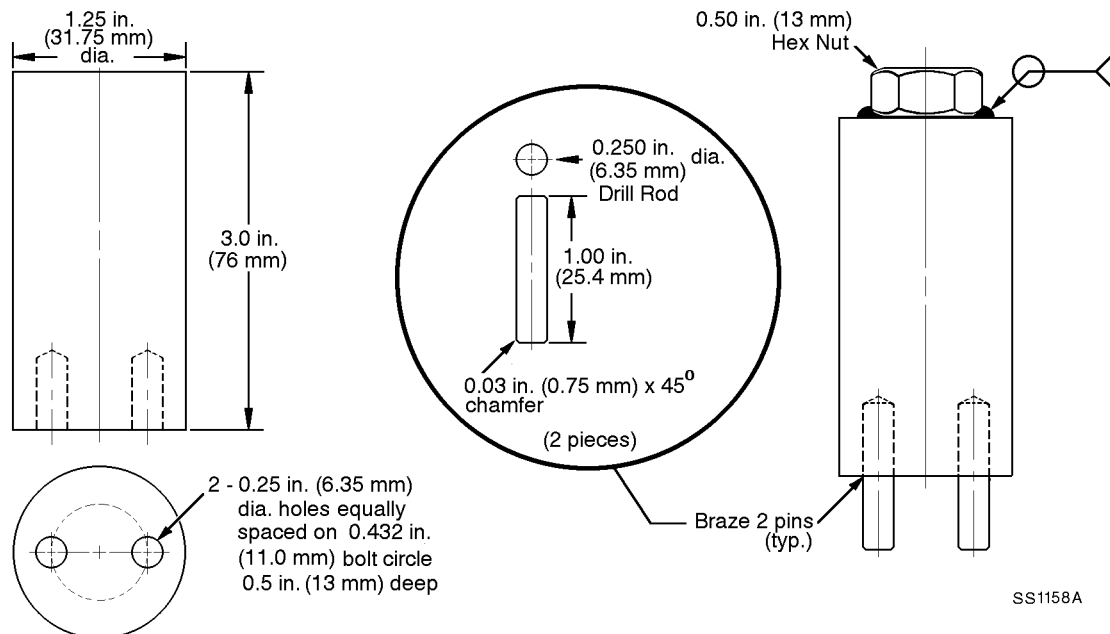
SS1158 PLUG INSTALLATION/REMOVAL TOOL
